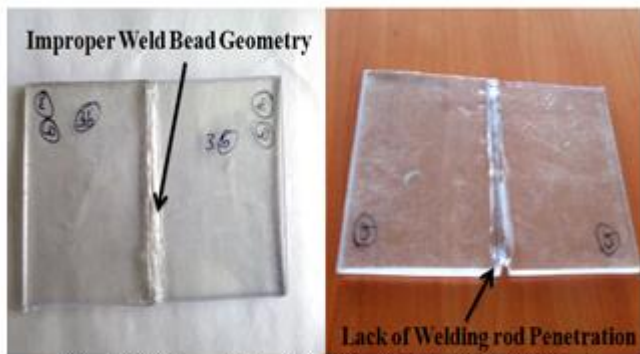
Hot air welded single V butt joint of PMMA sheet
